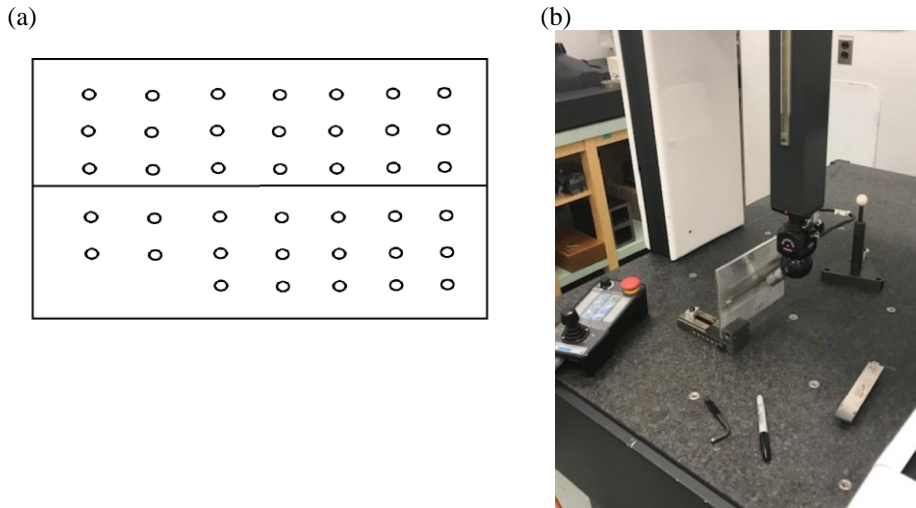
Distortion measurement (a) Position of 40 points on welded samples, (b) Current CMM machine for
